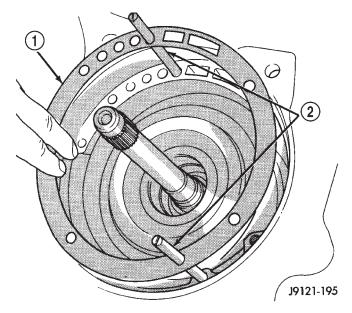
Installing Pilot Studs And Oil Pump Gasket 1 - OIL PUMP GASKET 2 - PILOT STUD TOOLS C-3288-B
